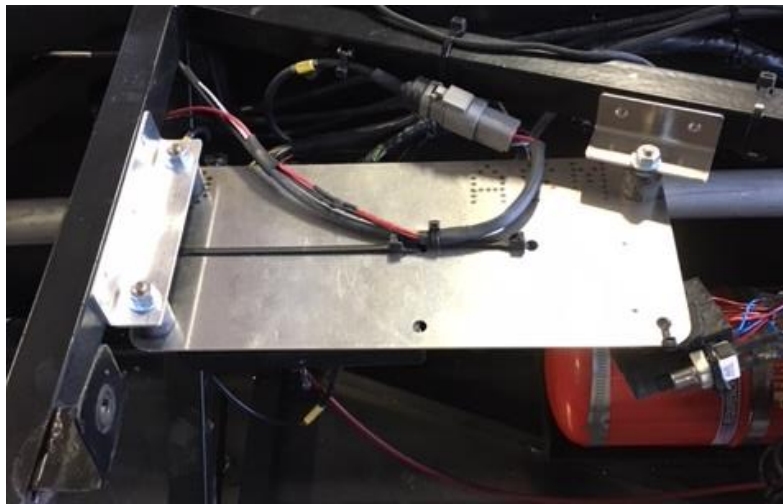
ECU, Relay, and Wide Band Mounting (Top View)
